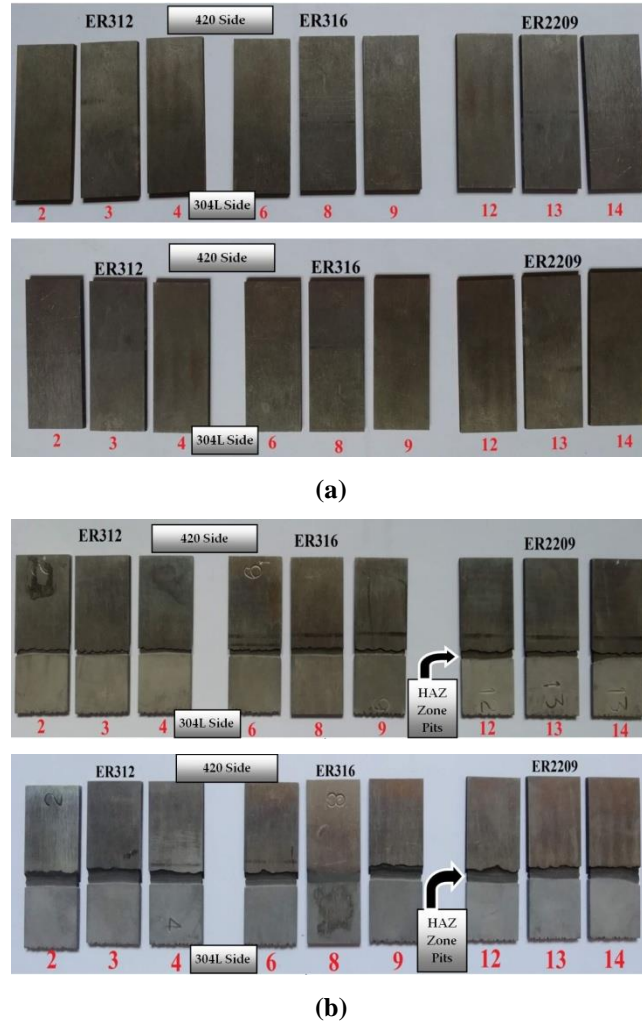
Front and rear side views of corrosion test specimens (a) before (b) after the test
